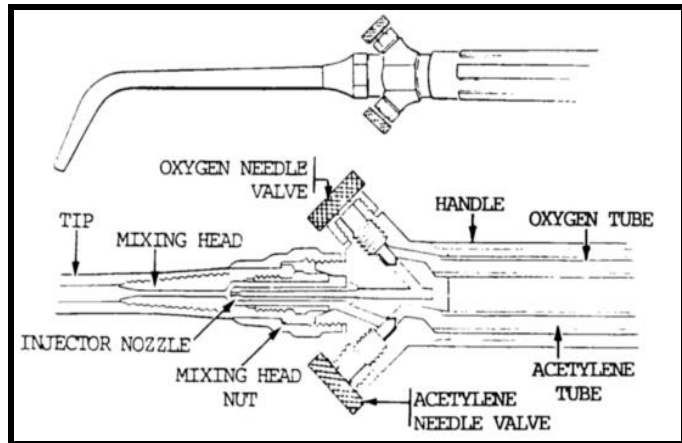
Schematic representation of mixing-head for welding torch.
